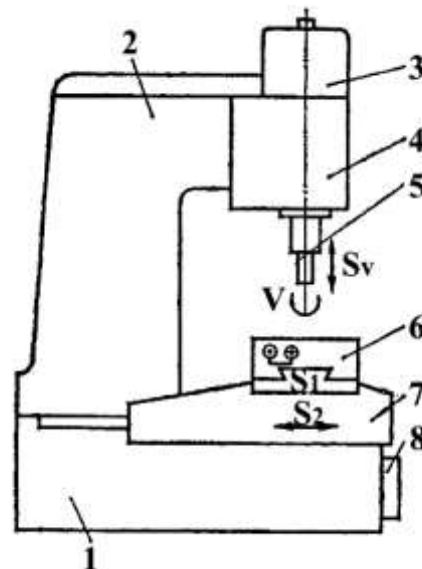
Fine boring machine: 1-bed; 2-frame; 3-drive; 4-boring head; 5-spindle; 6-table; 7-carriage; 8-drive
